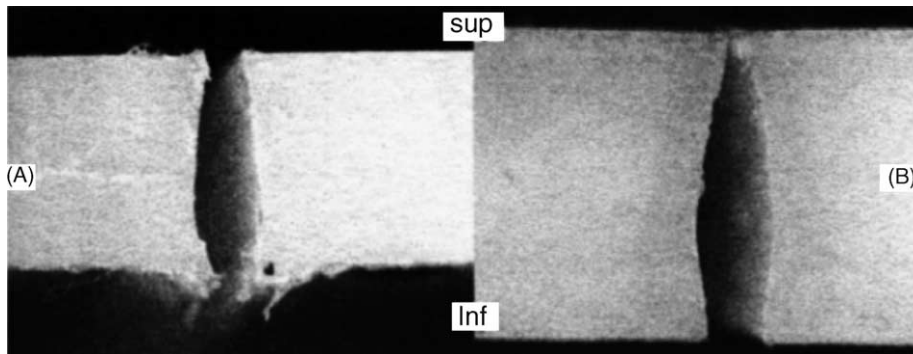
Macrographs on cross-sections of PE sheets laser cuts.
